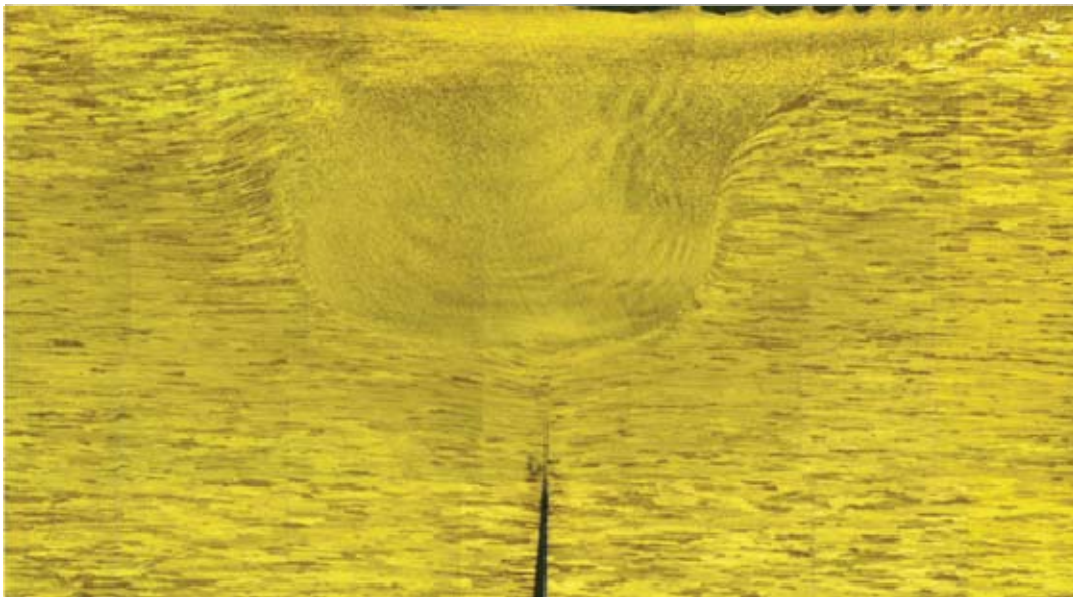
Transverse View of Unanodized to unanodized, weld location on the advancing side with a standard tool. (sample 1110)
